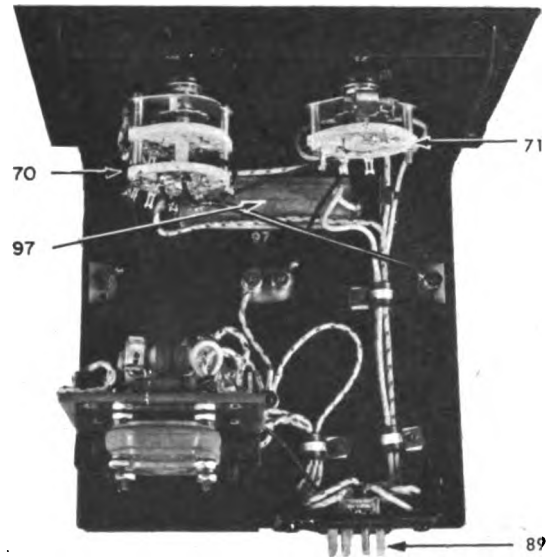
Radio Transmitter T-65/CRN-11, oscillator box, bottom view, cover off.
